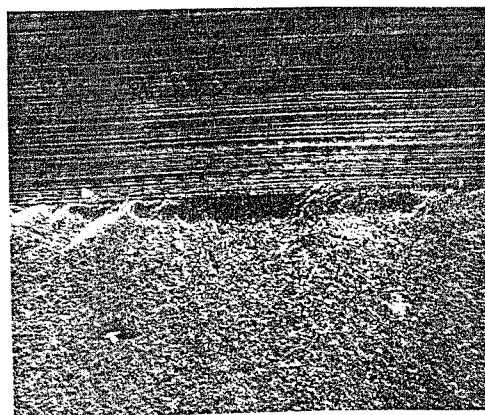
Machining flaw as fracture origin in glass. Rough surface is the bottom of a groove cut by a diamond saw. SEM. 200×
